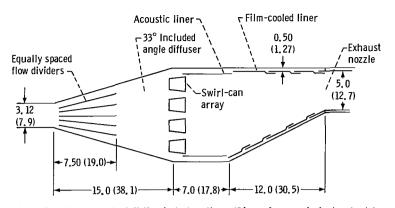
Combustor installation in test section. (Dimensions are in inches (cm).)
